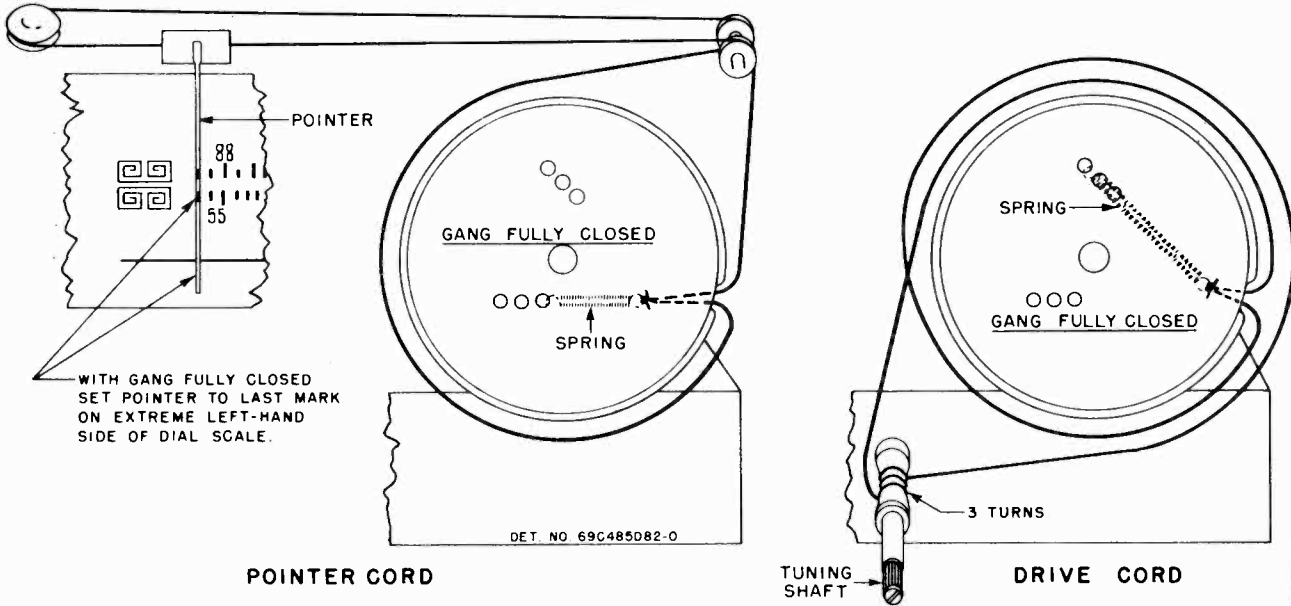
CHASSIS HS-133 STRING DRIVE DETAIL
